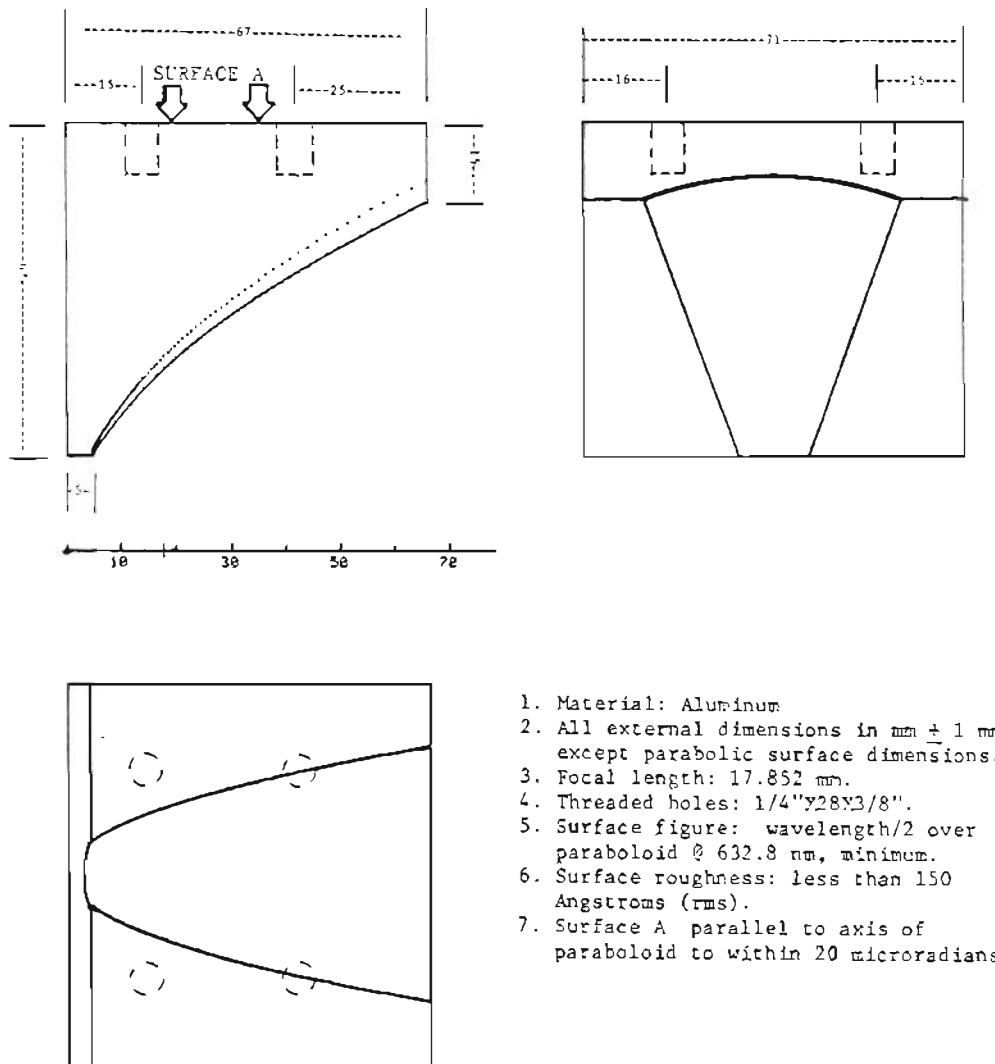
Technical specification drawing for mirror of Figure 7.2.
